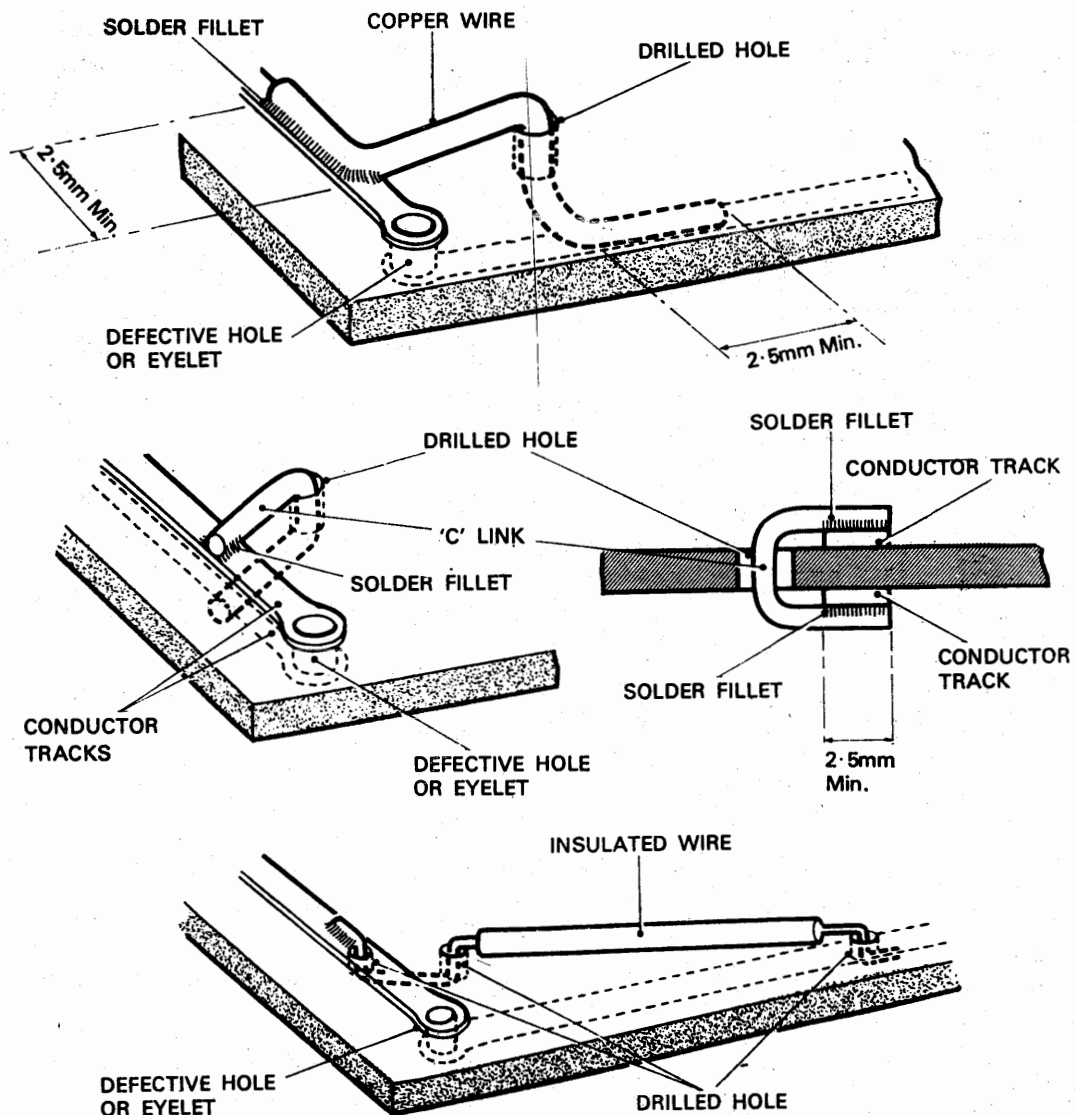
REPAIR OF DEFECTIVE PLATED-THROUGH HOLES AND EYELETS
